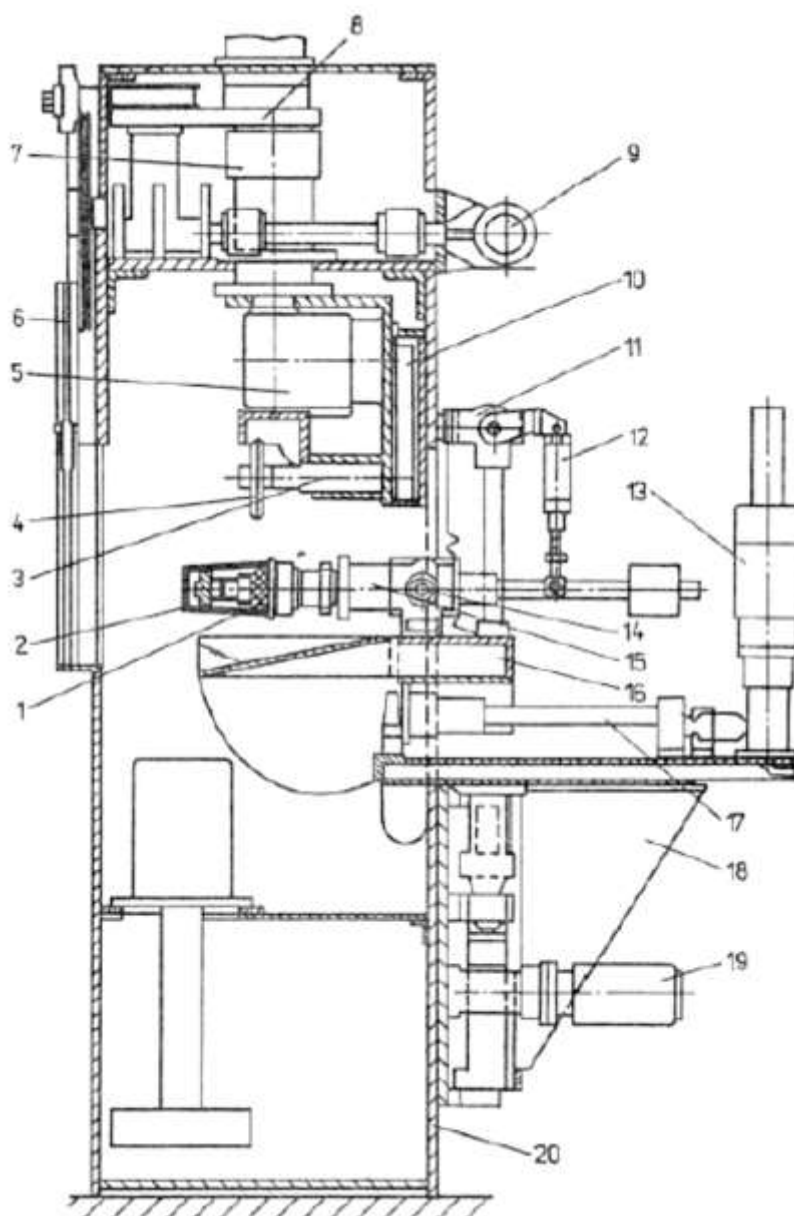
Section of individual section 8-station machine: 1 - rubber handle for vacuum-sucked glass, 2 - glass, 3 - grinding wheel shaft, 4 - diamond grinding wheel, 5 - electric motor, 6 - sliding transparent cover, 7 - bearing body enabling rotation of the grinding wheel, 8 - toothed belt, 9 - drive for turning the grinding wheel, 10 - belt driving the grinding wheel shaft, 11 - tilting mechanism, 12 - air cylinder, 13 - electric motor for table drive, 14 - tilting pivot point, 15 - rotating holder along its axis, 16 - sliding table, 17 - shaft driving the table feed, 18 - fixed table, 19 - electric motor for height adjustment of the sliding table, 20 - machine frame
